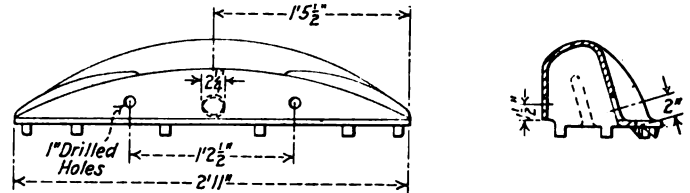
Drawing showing the location of the holes in the replacer for the clamp
